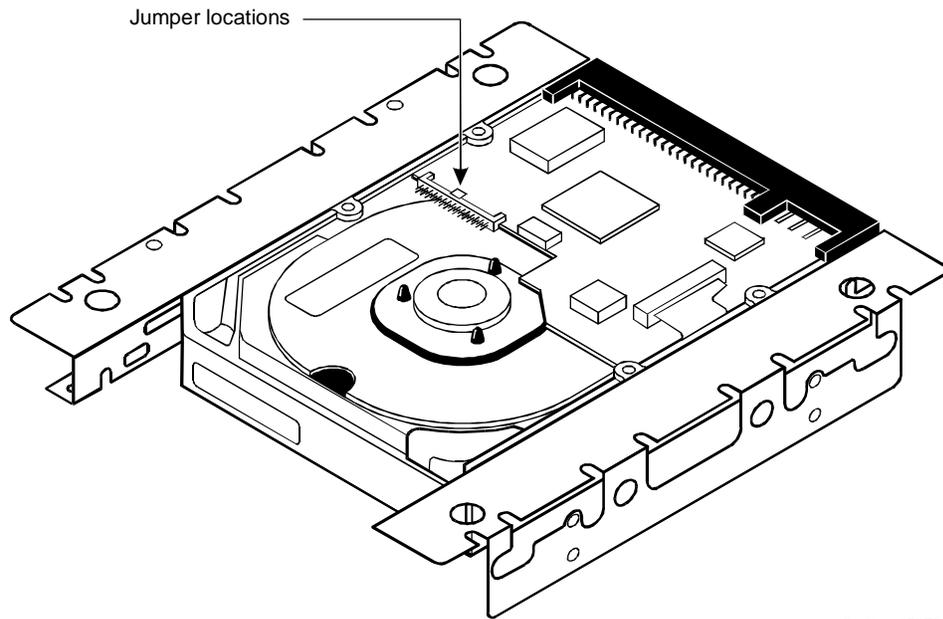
Jumper Settings for the Sixth Type A Hard Disk Drive Installed; Bay 4, SCSI ID = 5
